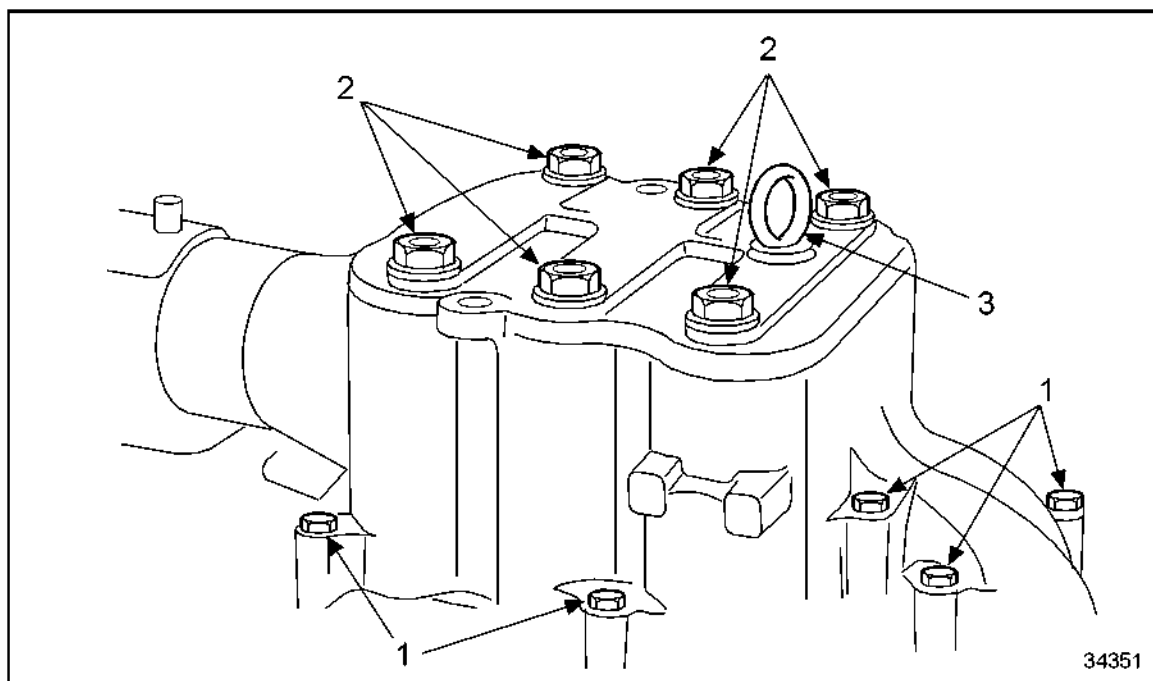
Lifting Oil Cooler Housing and Installing on Coolant Distribution Housing
